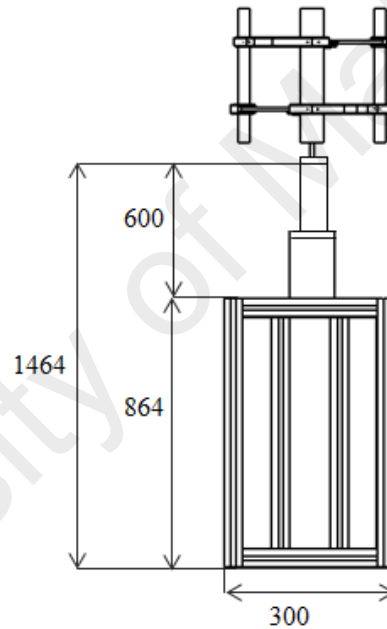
Detailed dimensions of the bare-CAWT (all dimensions in mm)
